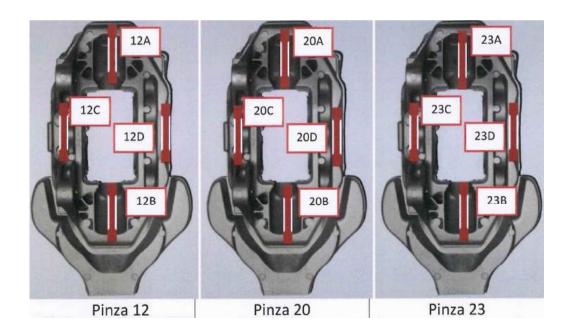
Photograph of the produced brake calliper, with indication of the zones where tensile test samples have been machined
